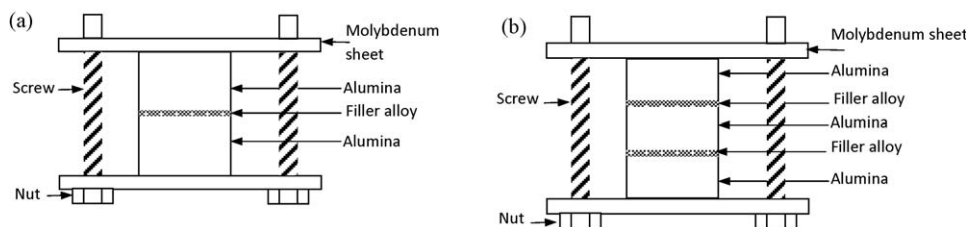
Fixtures for producing (a) single-butt joint and (b) double-butt joint.
